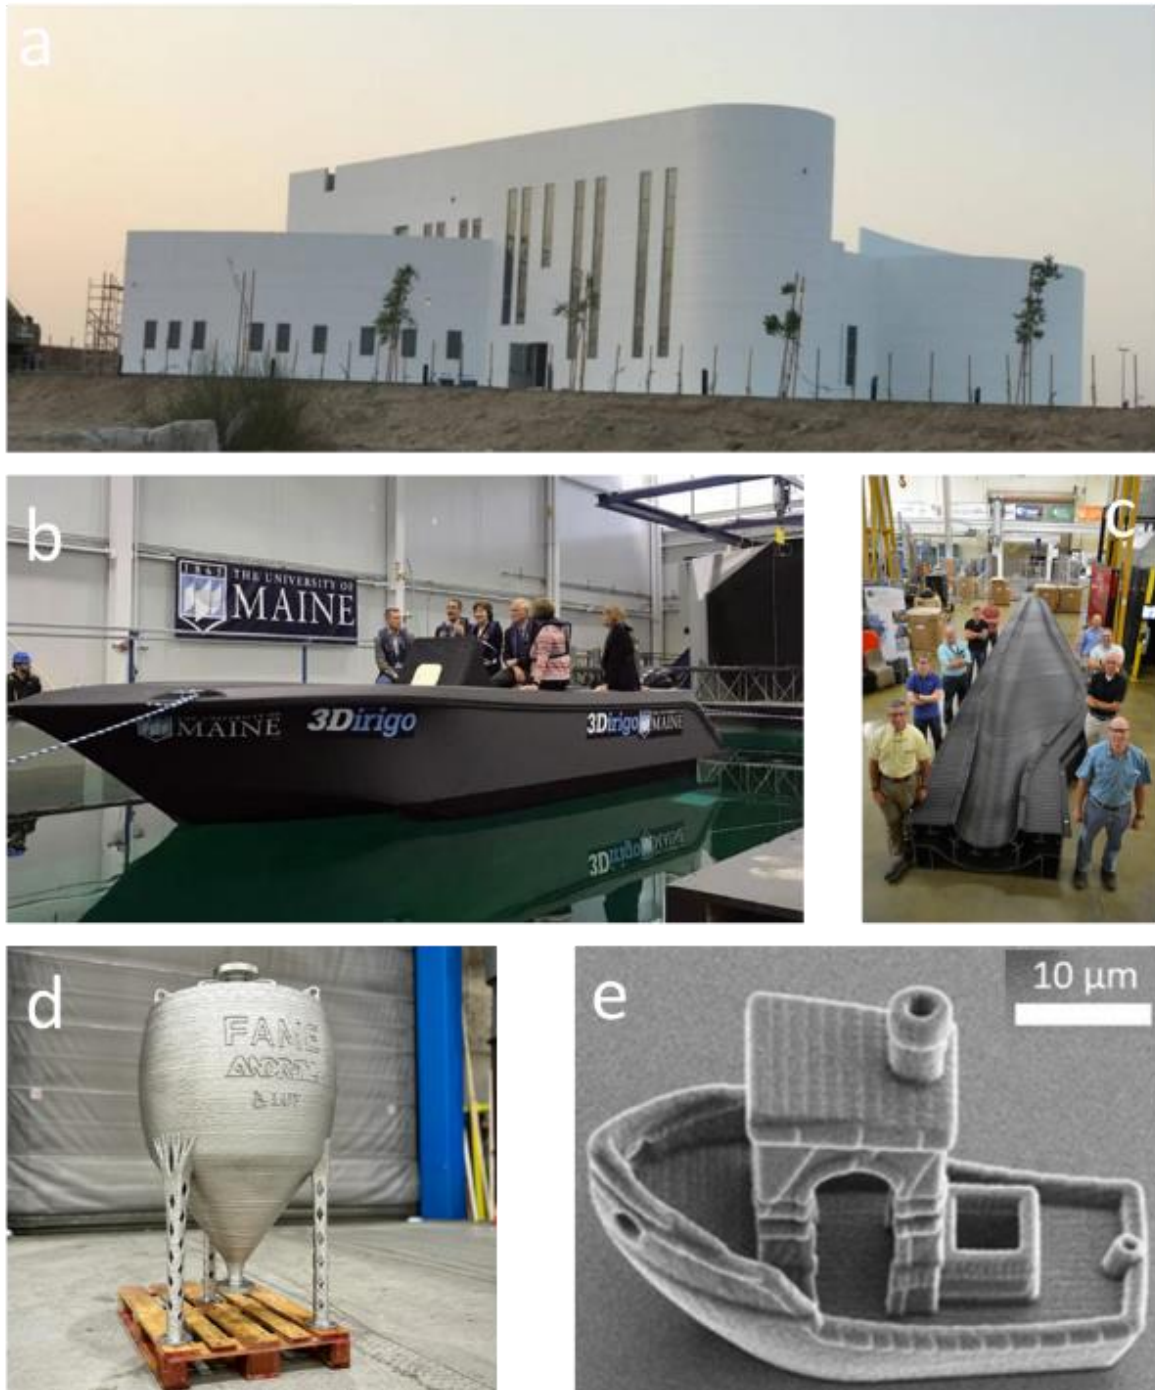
Size range of 3D printed objects. a) One of the largest 3D printed buildings, printed using concrete material extrusion with local materials as aggregate. b) 3D printed boat, printed using polymer material extrusion. c) 3D printed wind turbine blade mould, printed using polymer material extrusion. d) One of the largest 3D printed pressure chambers, approximately 1.5m tall, printed using metal WAAM. e) 3D printed 'benchy' boat benchmark print, printed using two photon polymerization, total length approximately 50 micrometres (source: Doherty *et al.*, 2020).
